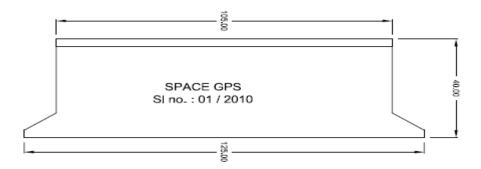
Mechanical Drawing of SPACE GPS unit: Box Side View
